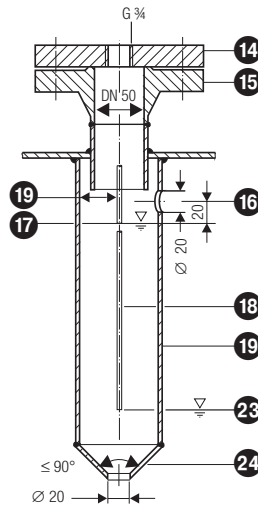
Protection tube (provided on site) for installation inside the boiler
